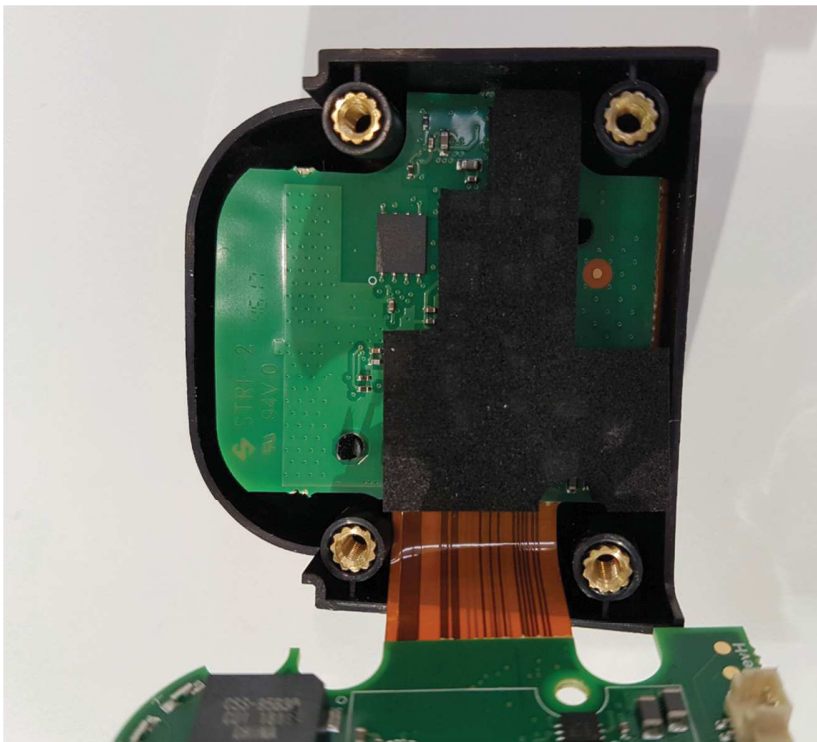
Side view of Radio Module and flexible PCB with radio coil
